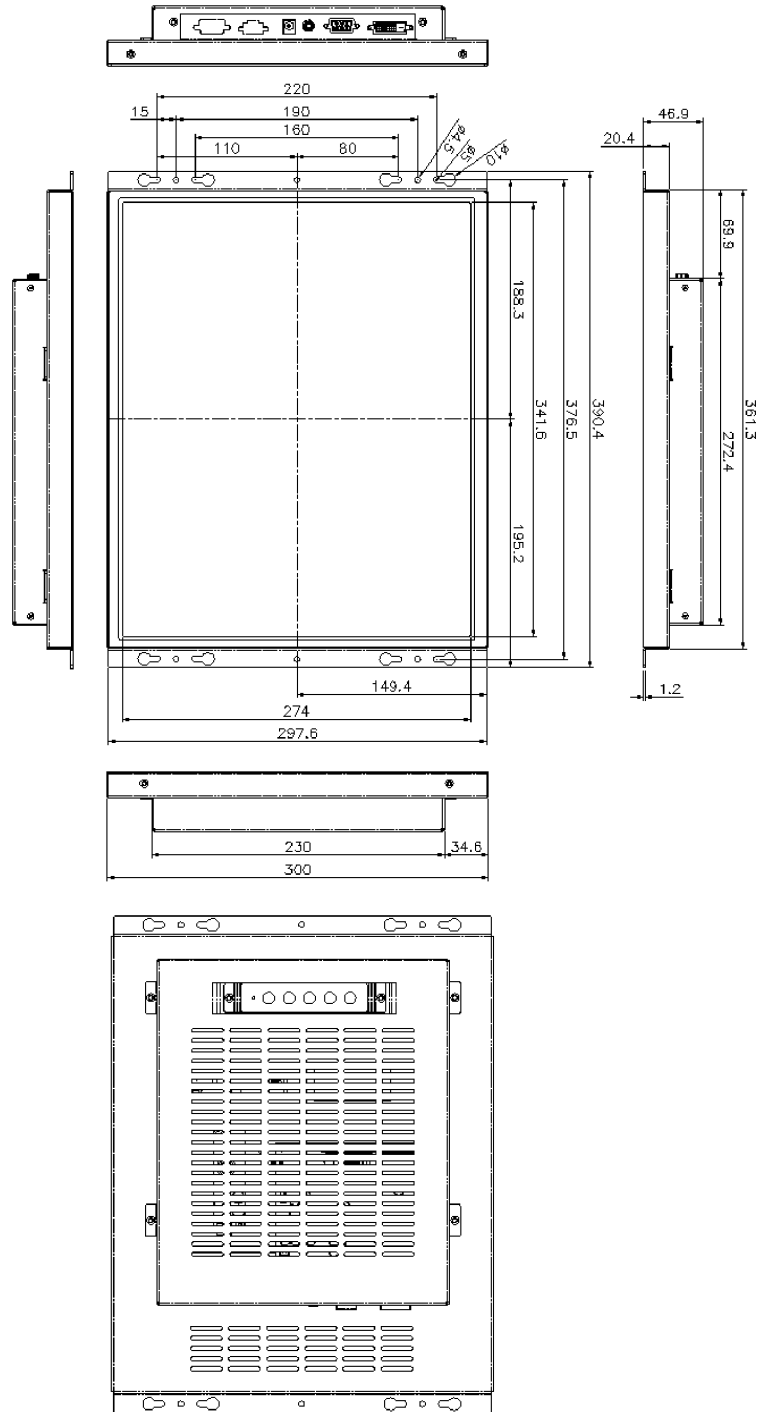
2007608 Physical Dimensions (millimeters)
